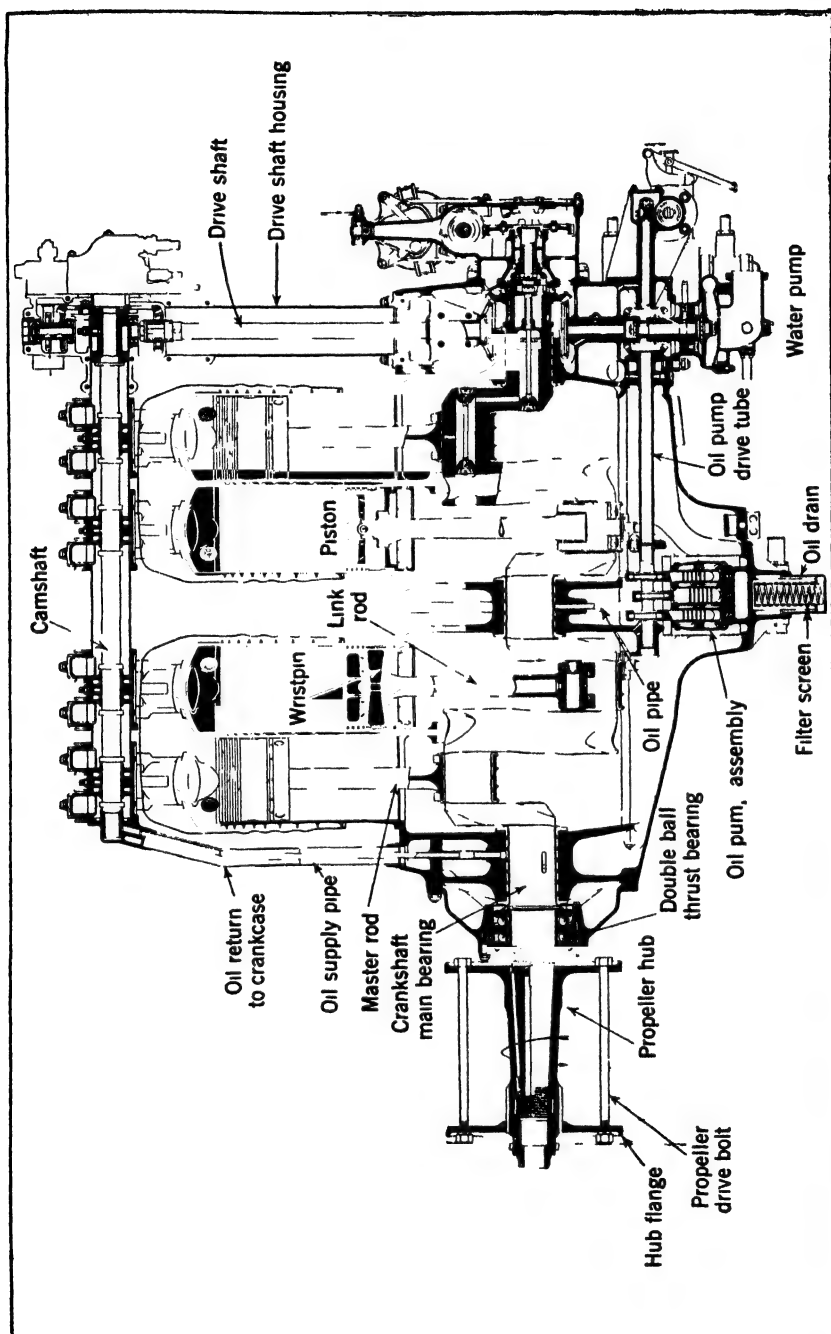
Longitudinal Vertical Sectional Drawing of the Lorraine "W" Type Engine Showing Design of Internal Mechanism.
